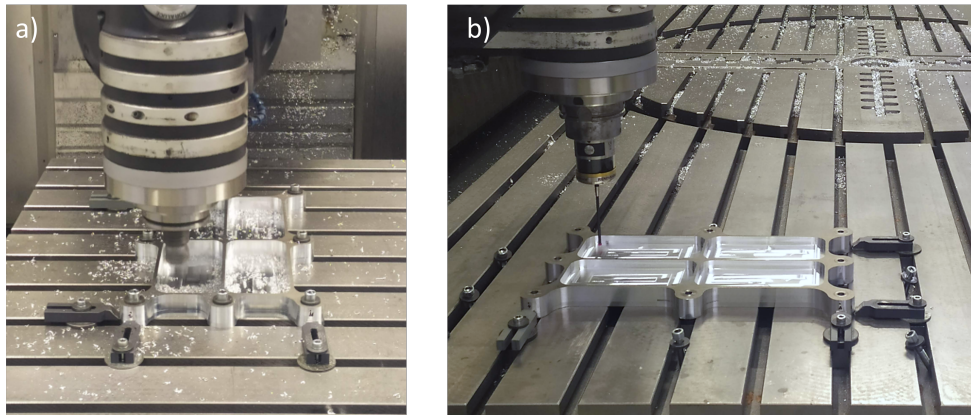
On-machine LR in a ribbed part for a 'j' layer: (a) Machining step; (b) Measuring step done by probing in the machining centre after the clamping is released.
